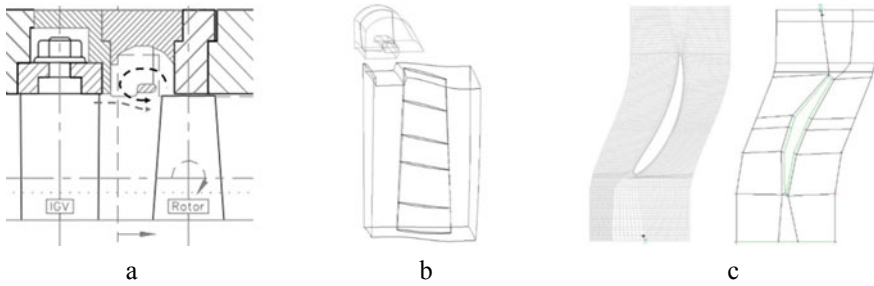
a Configuration of casing treatment with 80 vanes and 33.3% rotor exposure, b dimension of casing treatment tubular passage for 33.3% rotor exposure and c 53.5% rotor exposure
